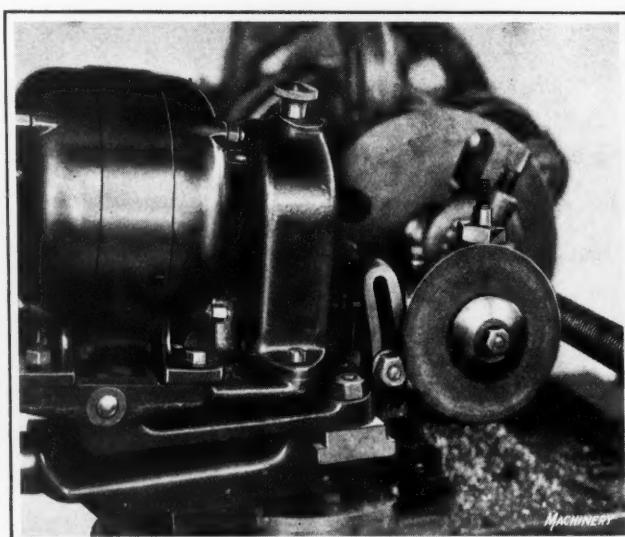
Device being used for grinding a Threaded Part, the Milling Cutter Spindle being in a Vertical Position
